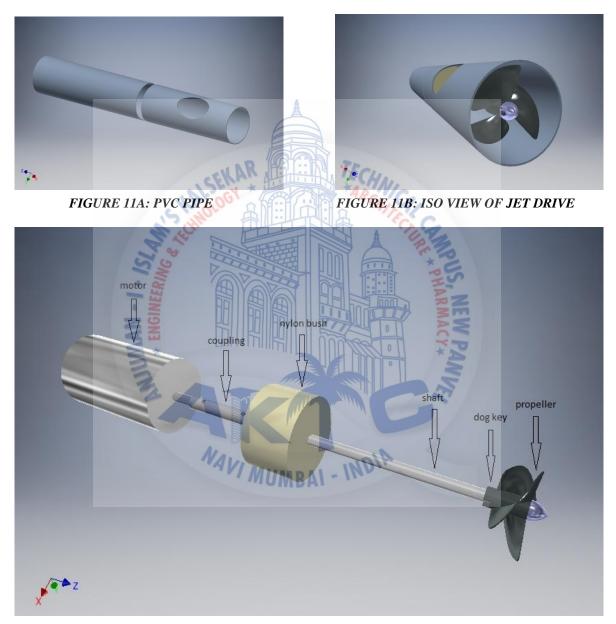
C: PARTS AND ASSEMBLY OF JET DRIVE.
